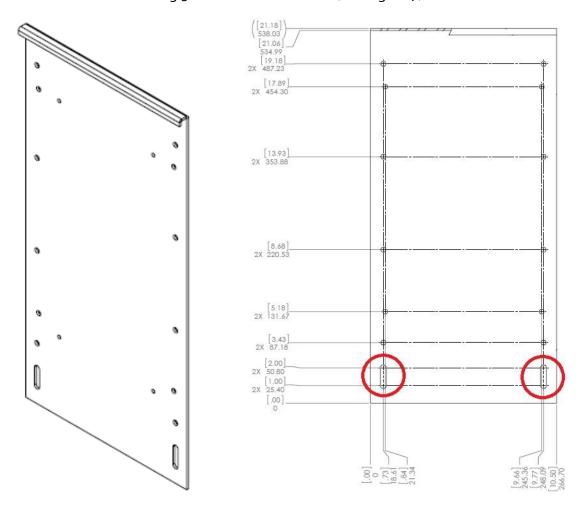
AID MOUNTING BRACKET (INSTALLATION HOLES ARE HIGHLIGHTED
